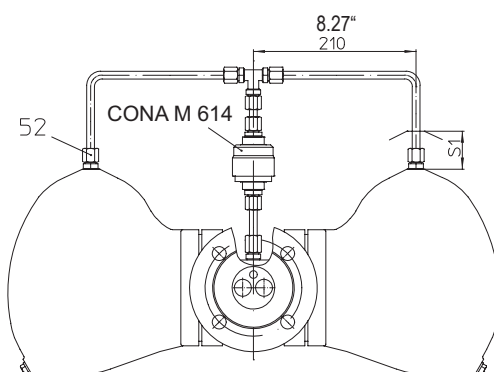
1 with flanges - horizontal installation and external vent kpl.
